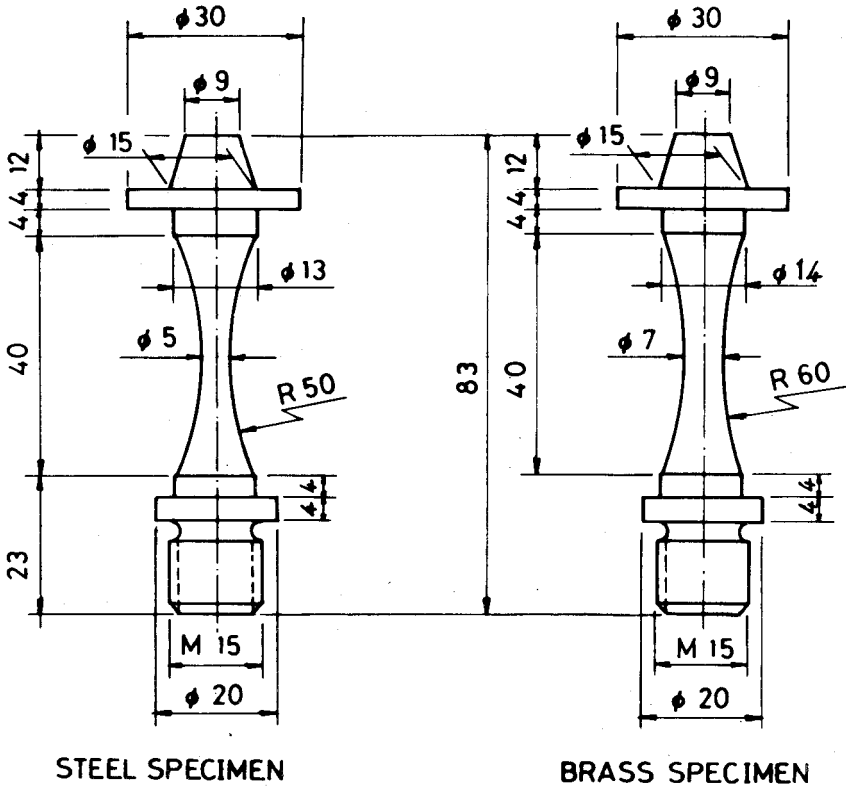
Test Specimens for Steel (C60) and Brass (Ms 58).
